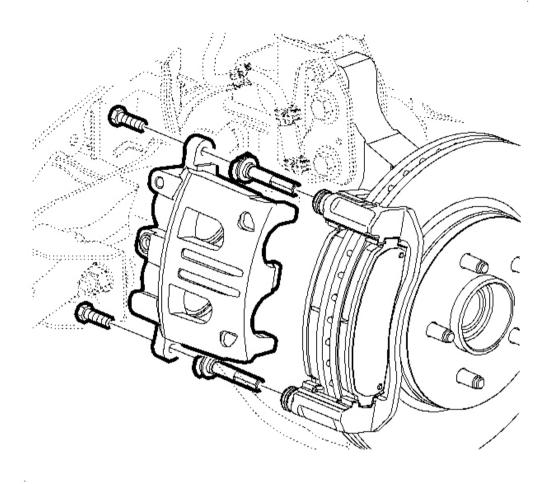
Removing/Installing Brake Caliper Guide Pins Courtesy of GENERAL MOTORS CORP.
